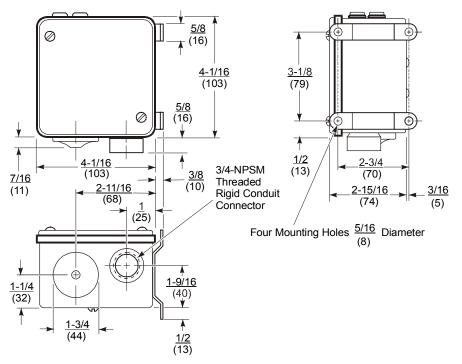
Dimensions for Low Pressure Controls with NEMA 3R Enclosure, in. (mm)
